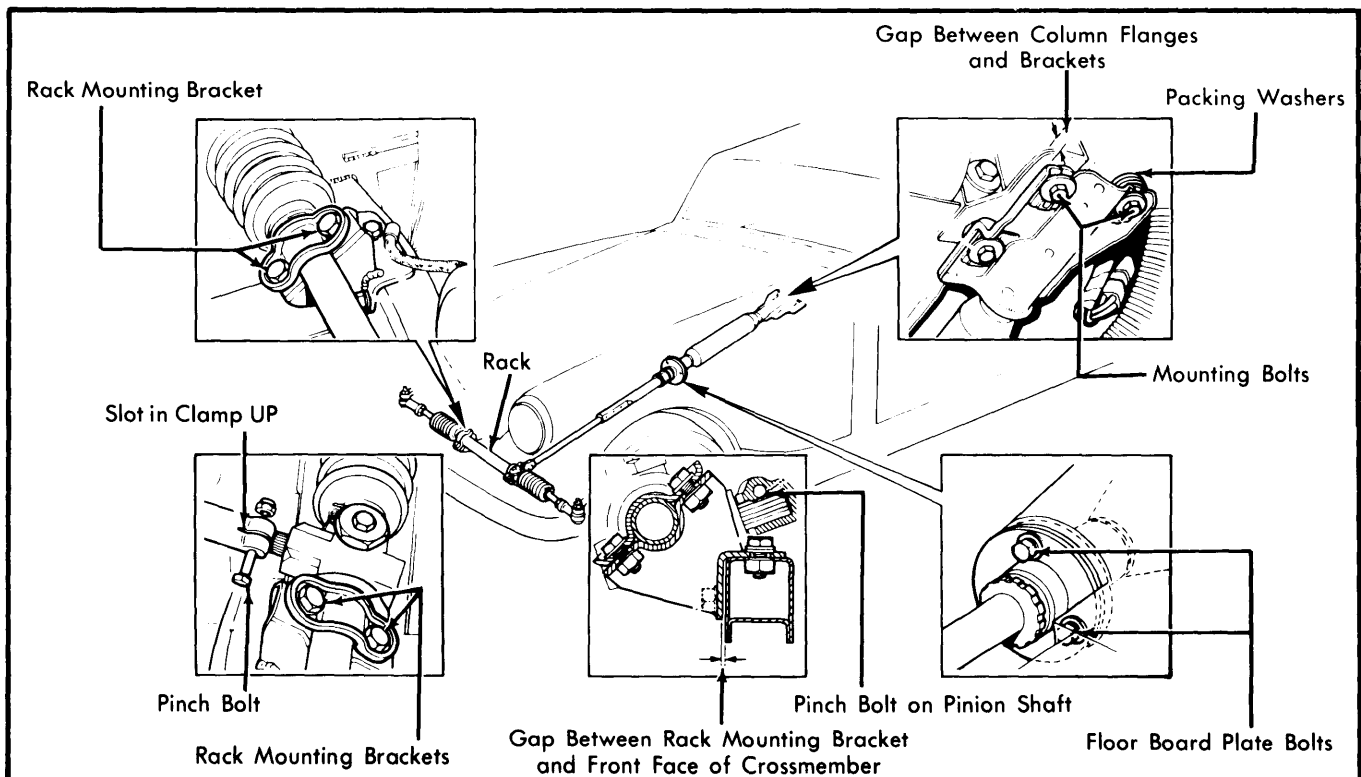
Preparation and Steps for Completing Steering Rack and Column Alignment
